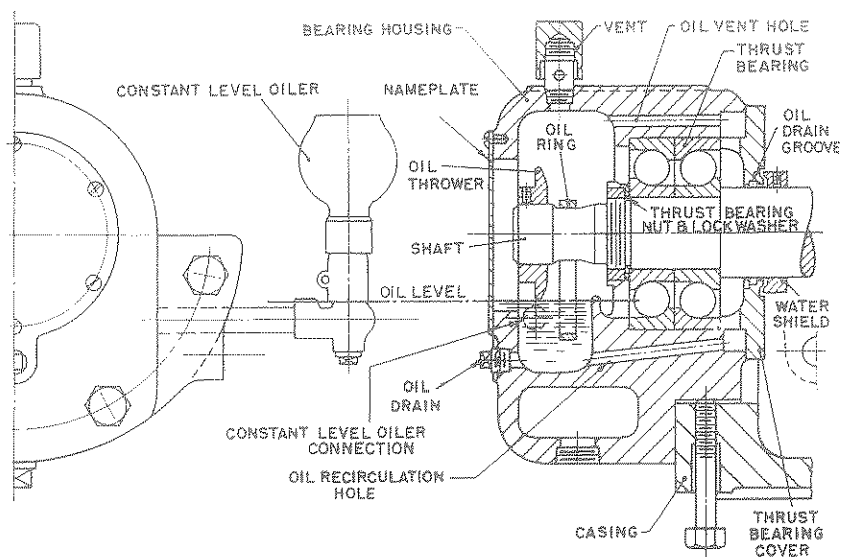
Thrust Bearing and Oil Lubrication System SK-163014
